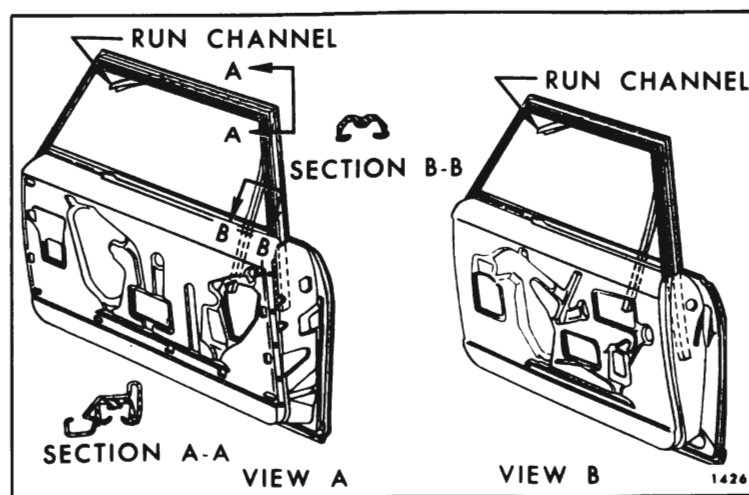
Front Door Glass Run Channel Assembly - "X" Closed Styles
